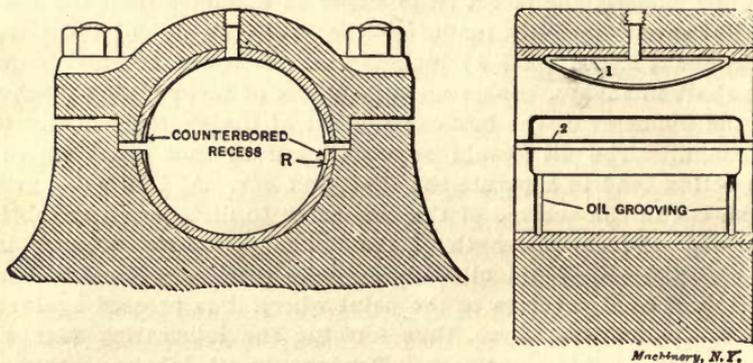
Section of Outboard Bearing, showing Oil Grooving and Counterbored Recess
